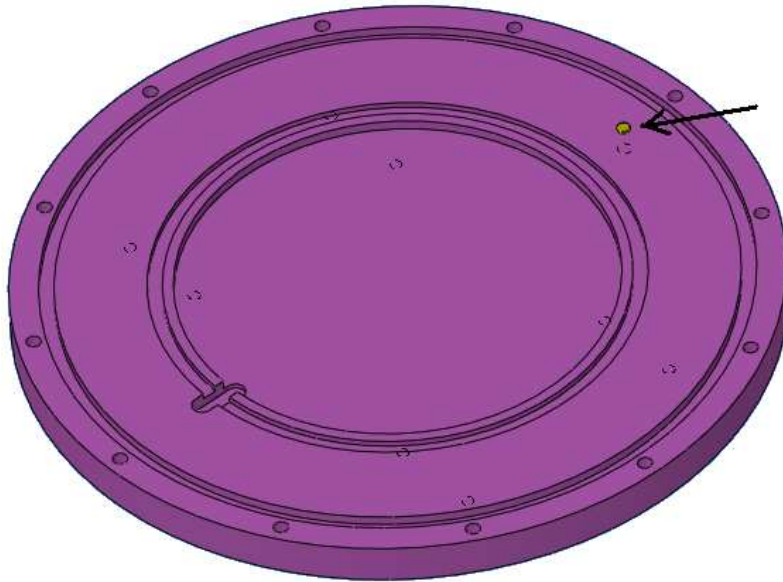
Make sure the vent screw does not stick out past the surface of the cap.
